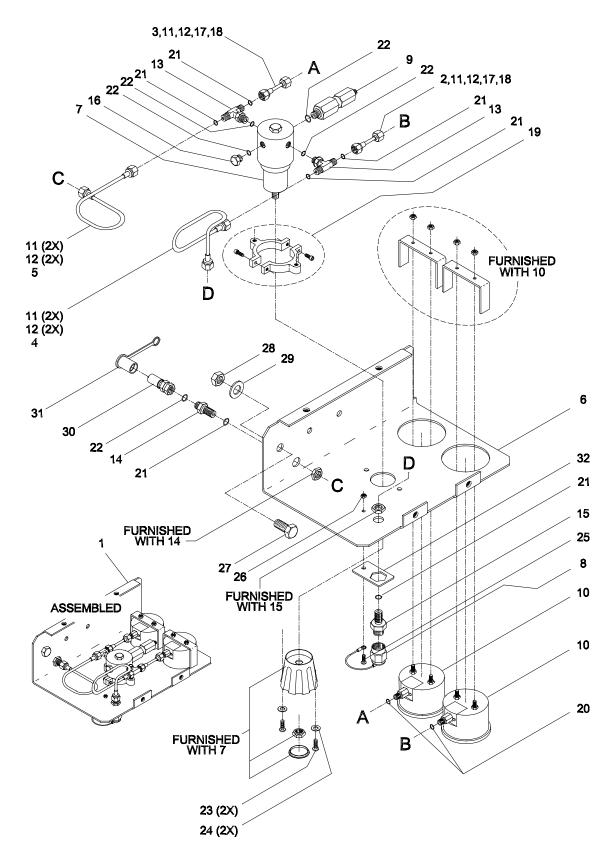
BARS Panel Assembly (Sheet 1 of 2)
